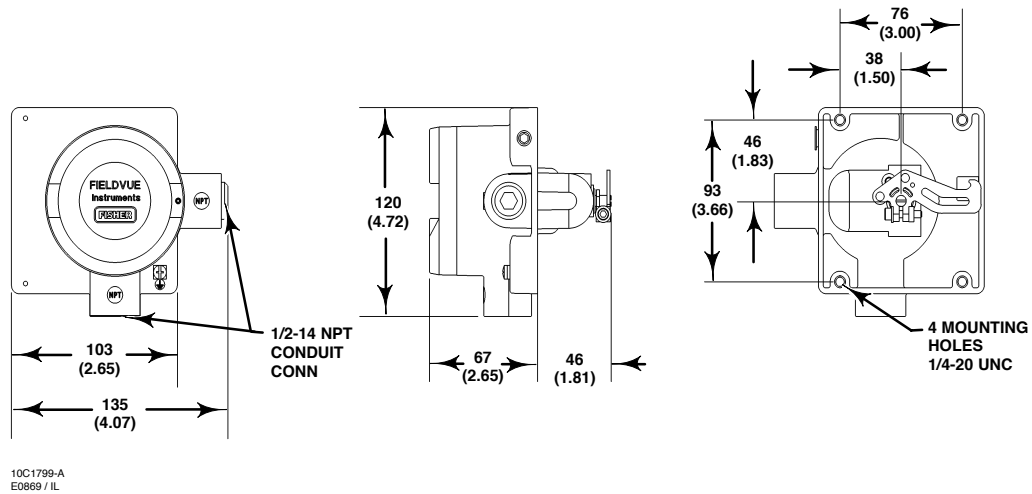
Dimensions for Remote-Mounted Instruments—Type DVC6005 Base Unit
